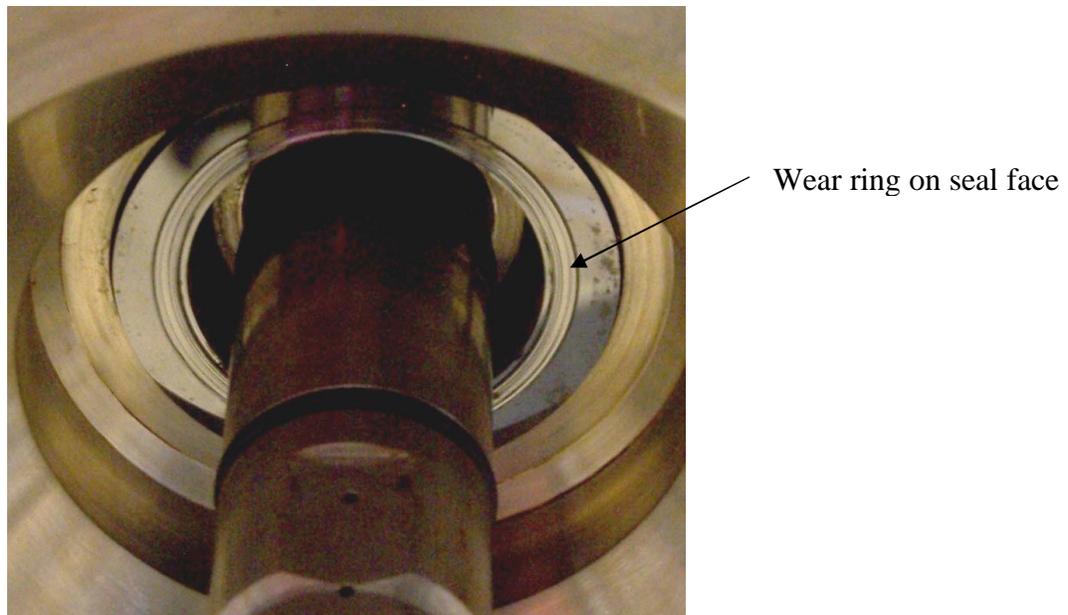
Photograph of the Wear on the Shaft Mechanical Seal Stationary Face after 120 Hours of Testing
